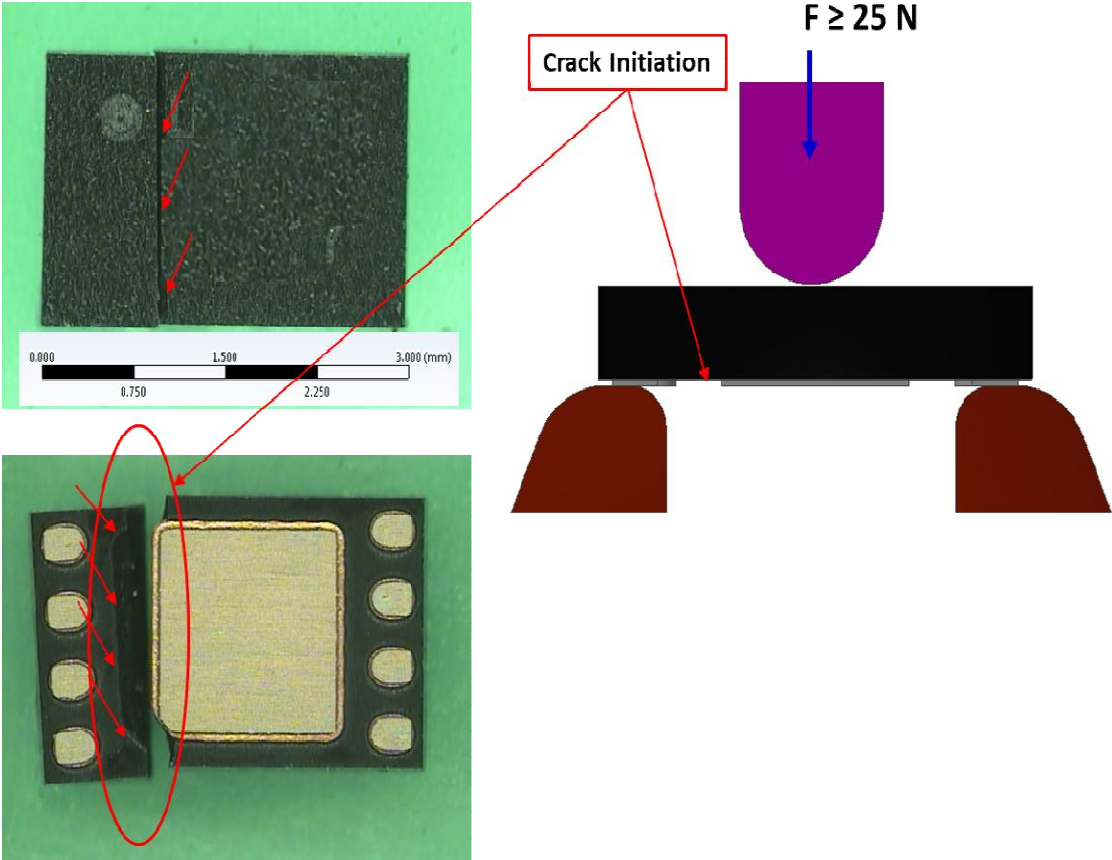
Crack signatures for the tested package not mounted on PCB in Fig. 5b
